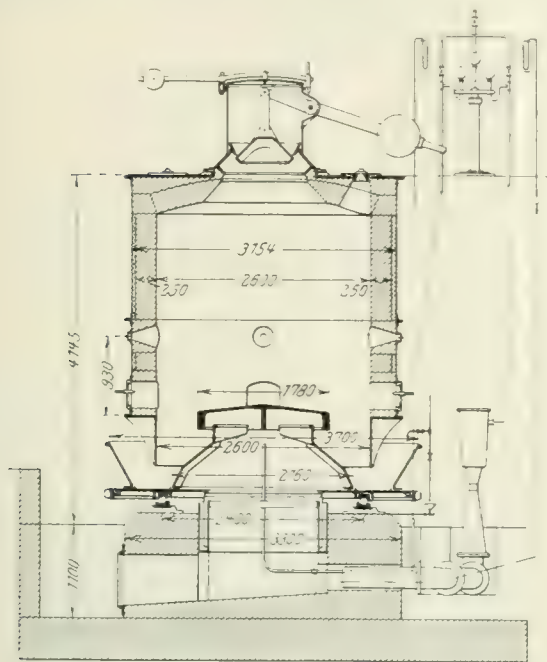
The Hilger Gas Producer.—Dimensions in Millimeters.
